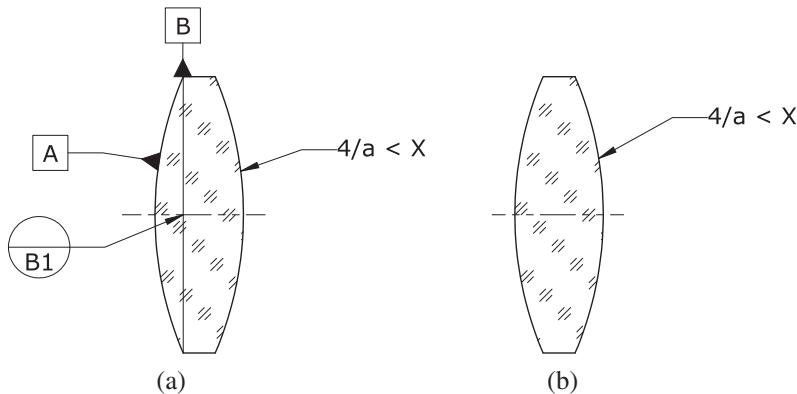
Axial runout tolerance on the right optical surface relative to the left surface and the cylindrical surface datum (a) explicitly and (b) implicitly.
